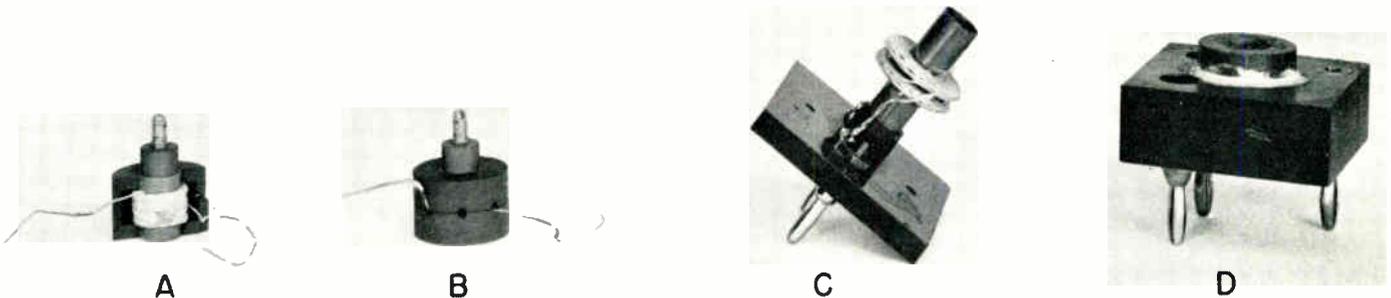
A. Cut-away view of, B, complete coil assembly. C. First test coil found unsatisfactory because of open construction. D. Test jig that has proved to be satisfactory. Readings check to within 0.1% between jigs.
